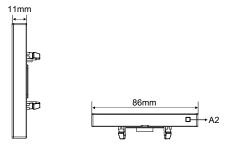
Dimensions - Side View Figure 4. Dimensions - Side View
